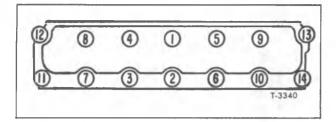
Cylinder Head Bolt Tightening Sequence on In-Line Engine
